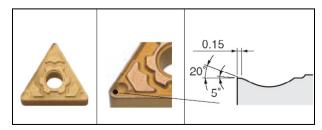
Cutting Tool : TiCN+Al $_2$ O $_3$ +TiN PVD Coated Carbide Cutter
